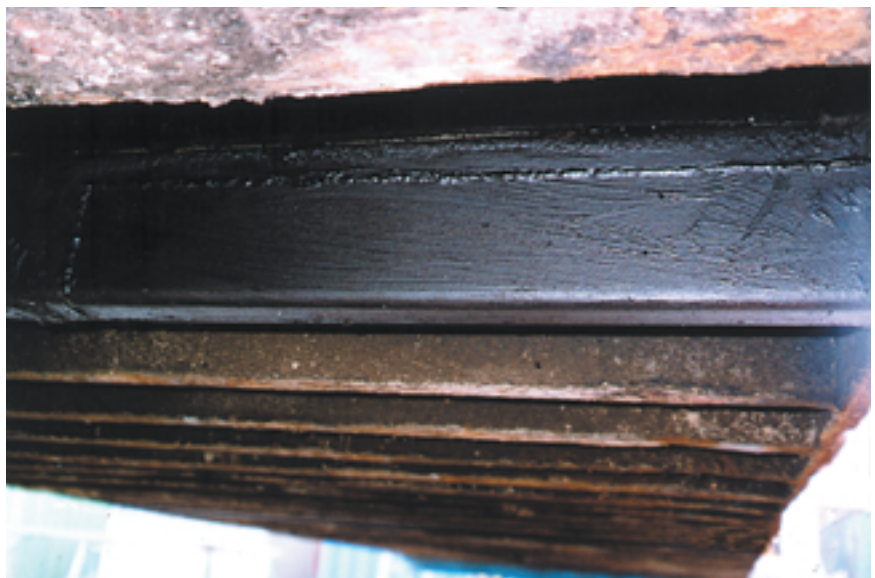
(to right) / Completed crossmember insert including undercoating
